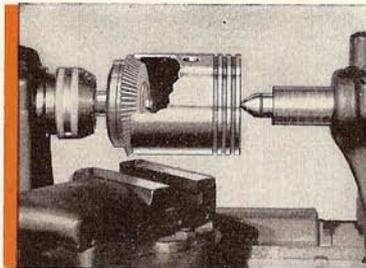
Reaming the Skirt of a Piston. Reamer is Held on Piston Adapter Shank.
